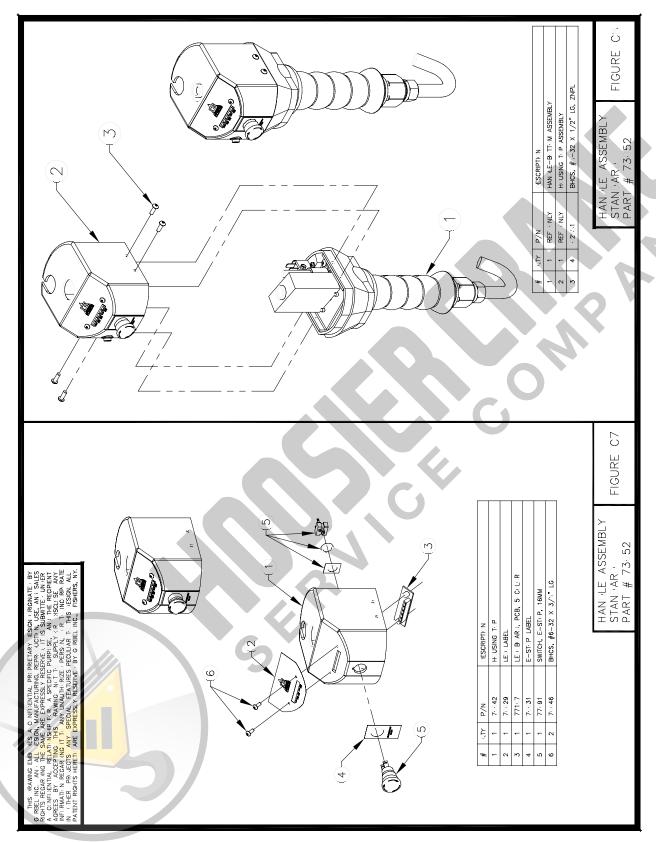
(bottom) & Figure C8 (top). Standard Handle Assembly.
